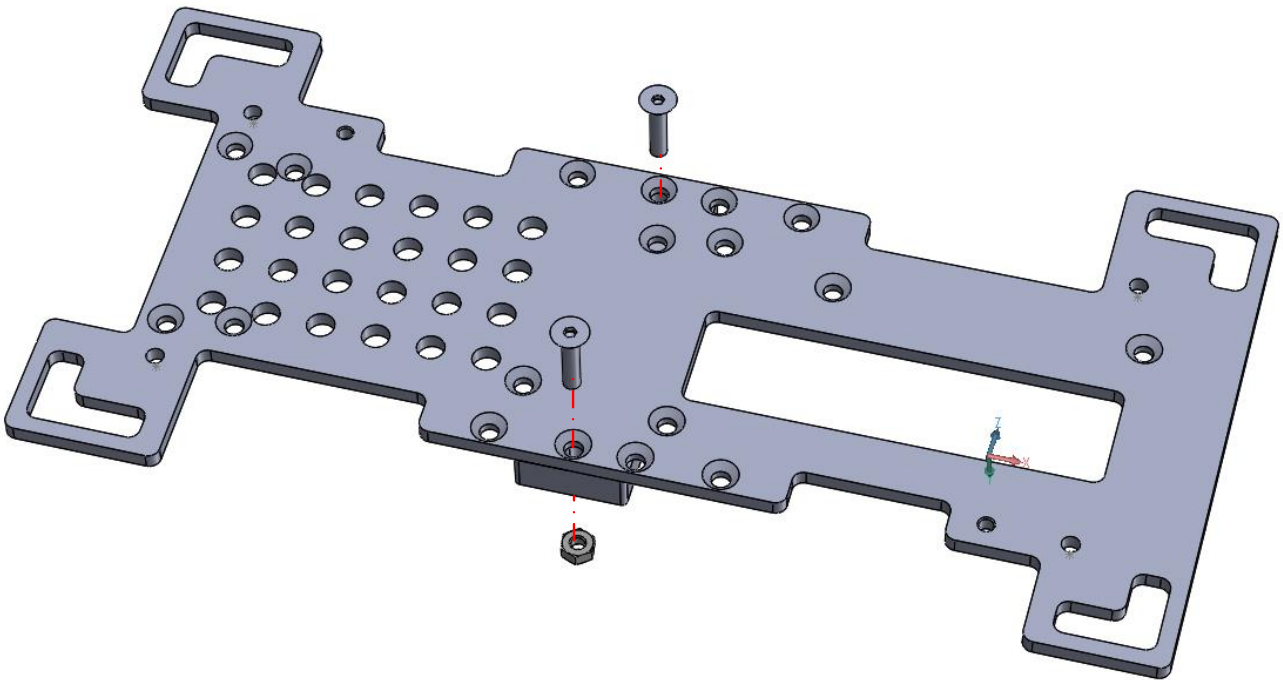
Tripod adapter mount (view from bottom of mounting plate)
